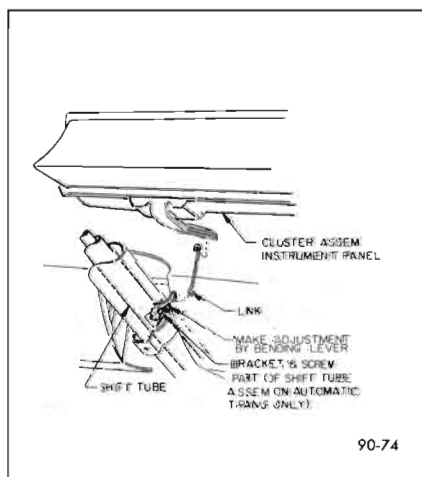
Removing Shift Indicator (45-46-48-49000 Series)
